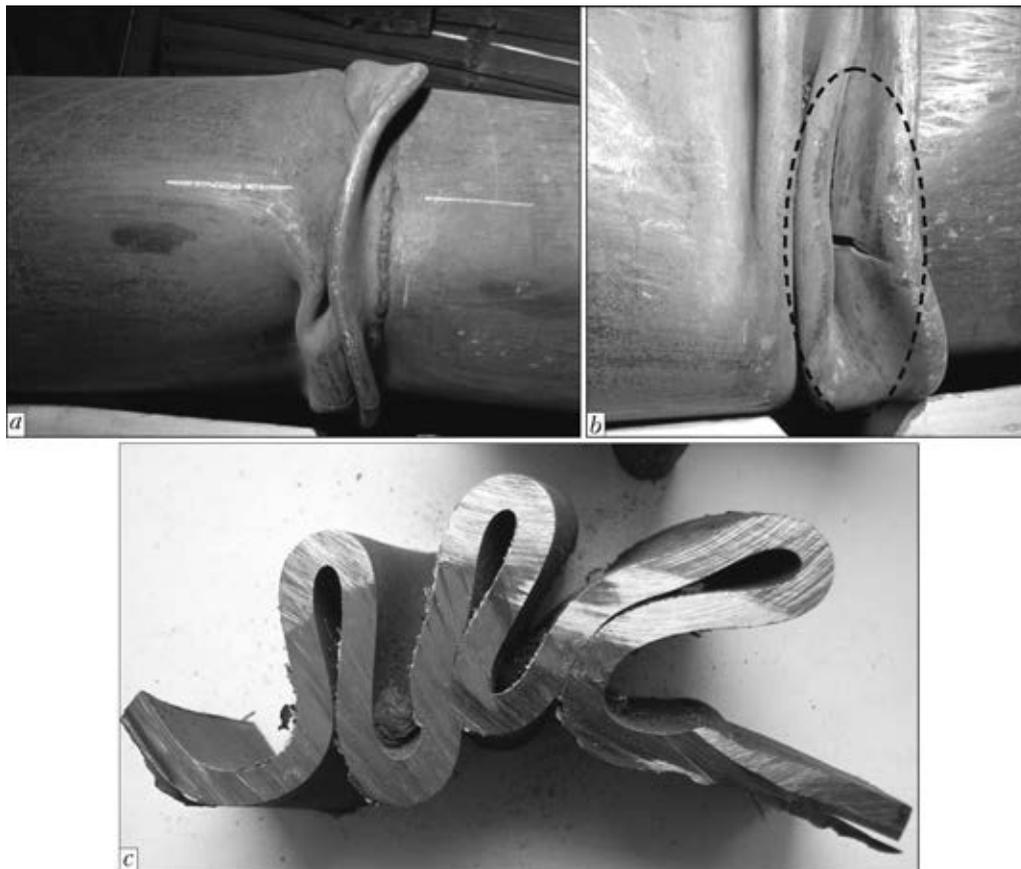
Damaged pipe section: *a* – general view of studied sample; *b* – damaged fragment with through-thickness crack; *c* – wall deformation
